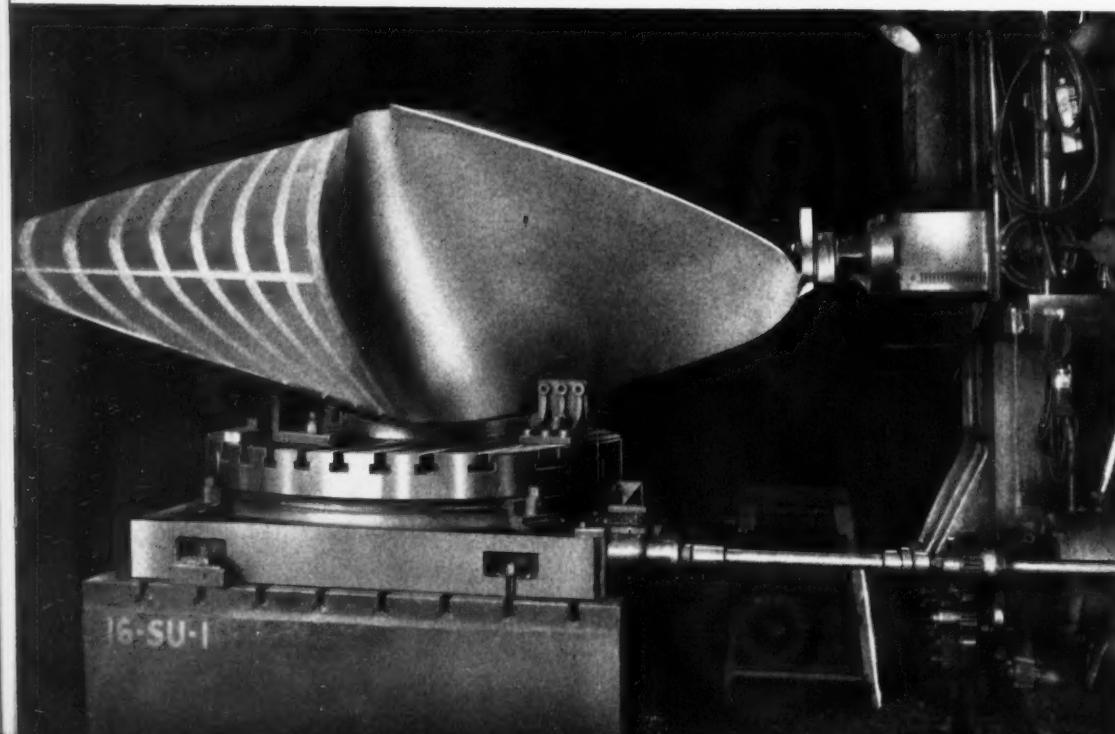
Planing the Leading Side of a Large Constant-pitch Propeller on a Draw-cut Shaper
